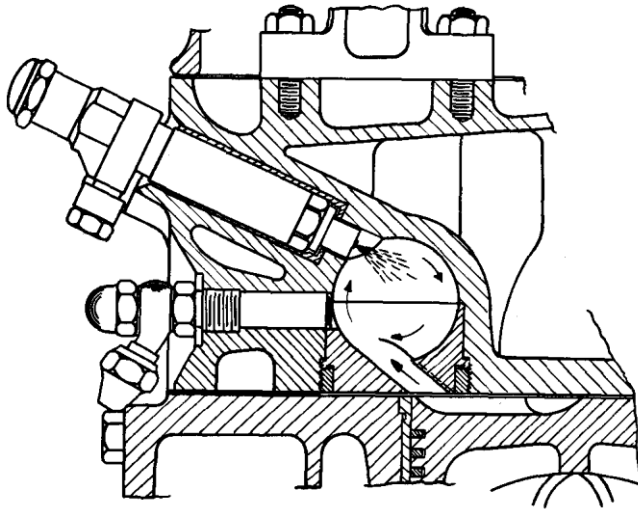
Paxman-Ricardo 'Comet' cylinder head.
